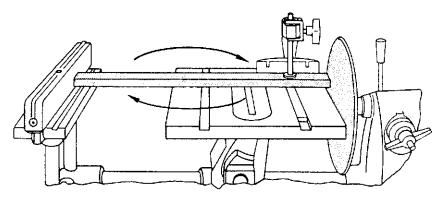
Sand one end of the board until it's smooth; then turn the board as shown and sand the other end until the depth control stops the sanding disc.
